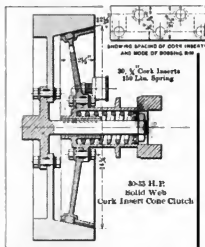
"Cork Insert" clutch, of the cone type, made by General Manufacturing Company for many car makers
